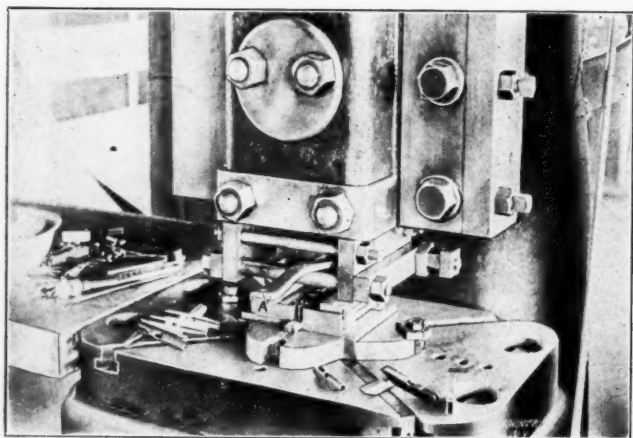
The Flattening and Serrating Punch and Die Ready for Use
